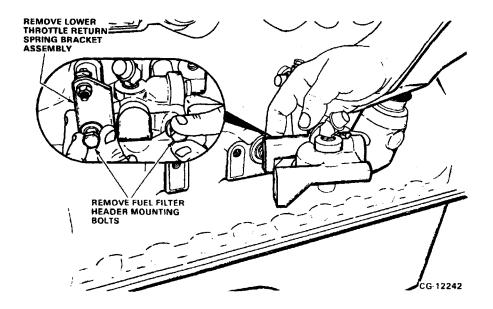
Remove Fuel Filter Header and Lower Throttle Return Spring Bracket Assembly (Early Production Shown)
